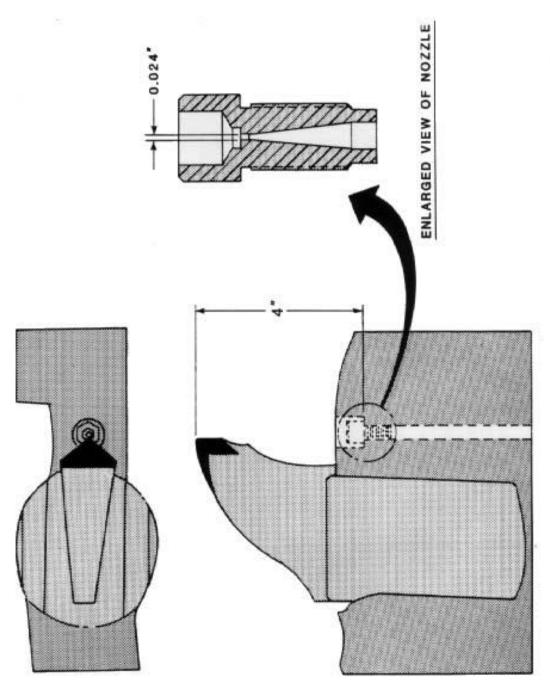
Bit mounting and jet nozzle used on the longwall coal shearer.
